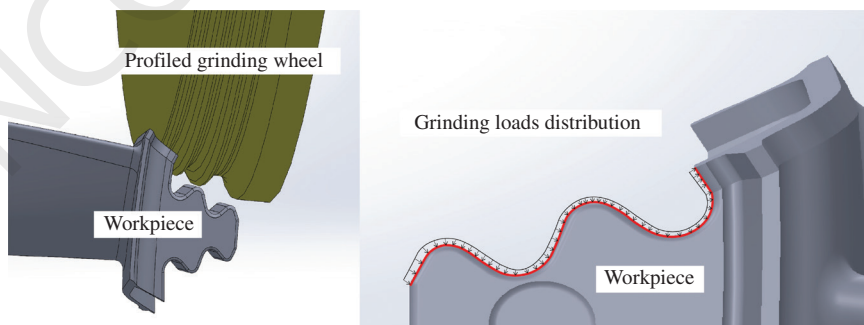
Schematic illustration of grinding loads along the turbine blade root shape.
